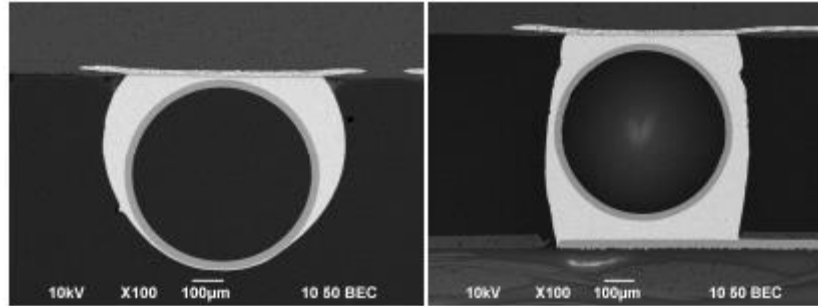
Cross-section of polymer core solder ball after balling (left) and assembly (right).
